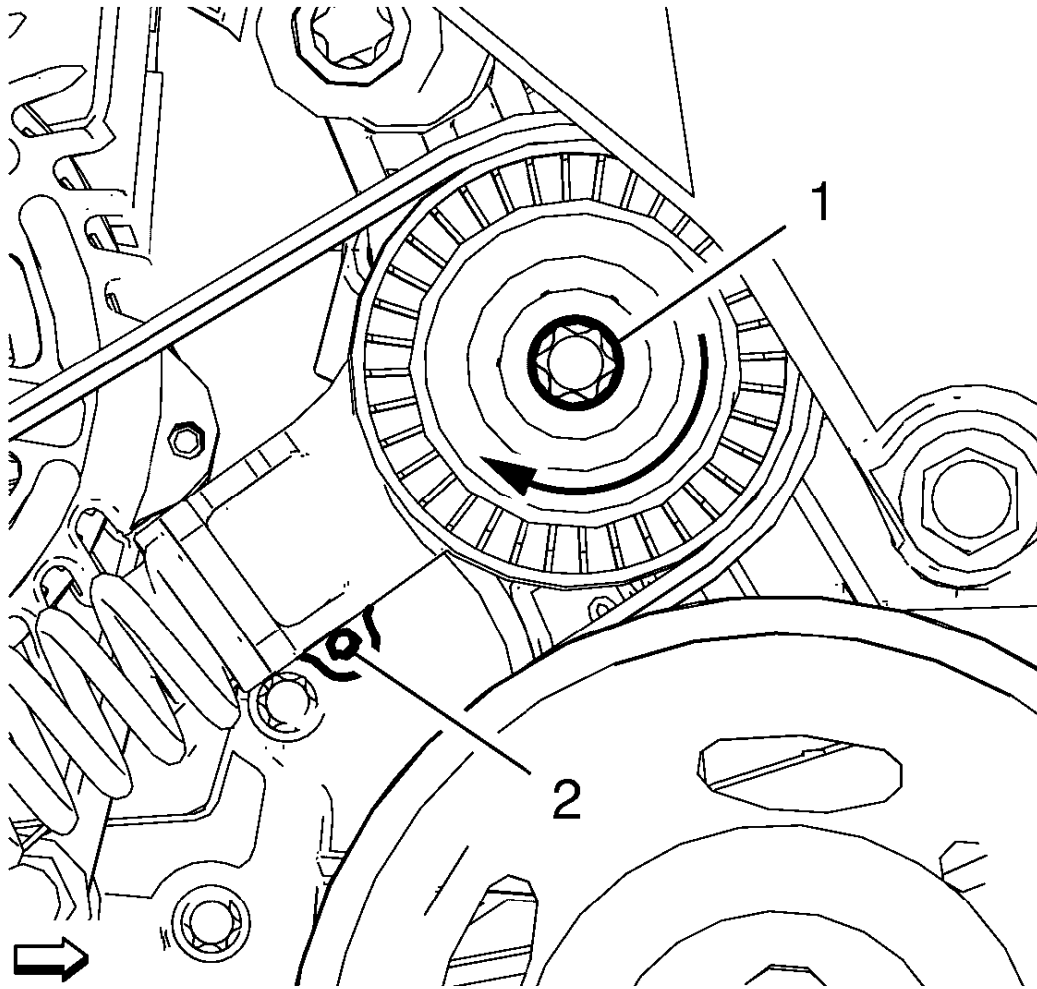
Drive Belt Tensioner Pulley And Bolt
